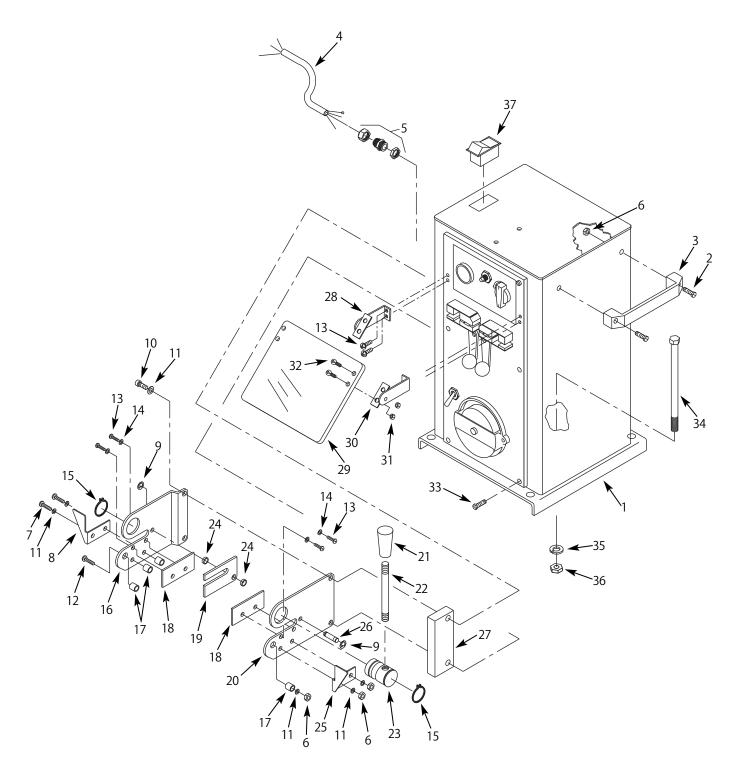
Parts Illustration for Shear and Deflector (Front of Welder)
